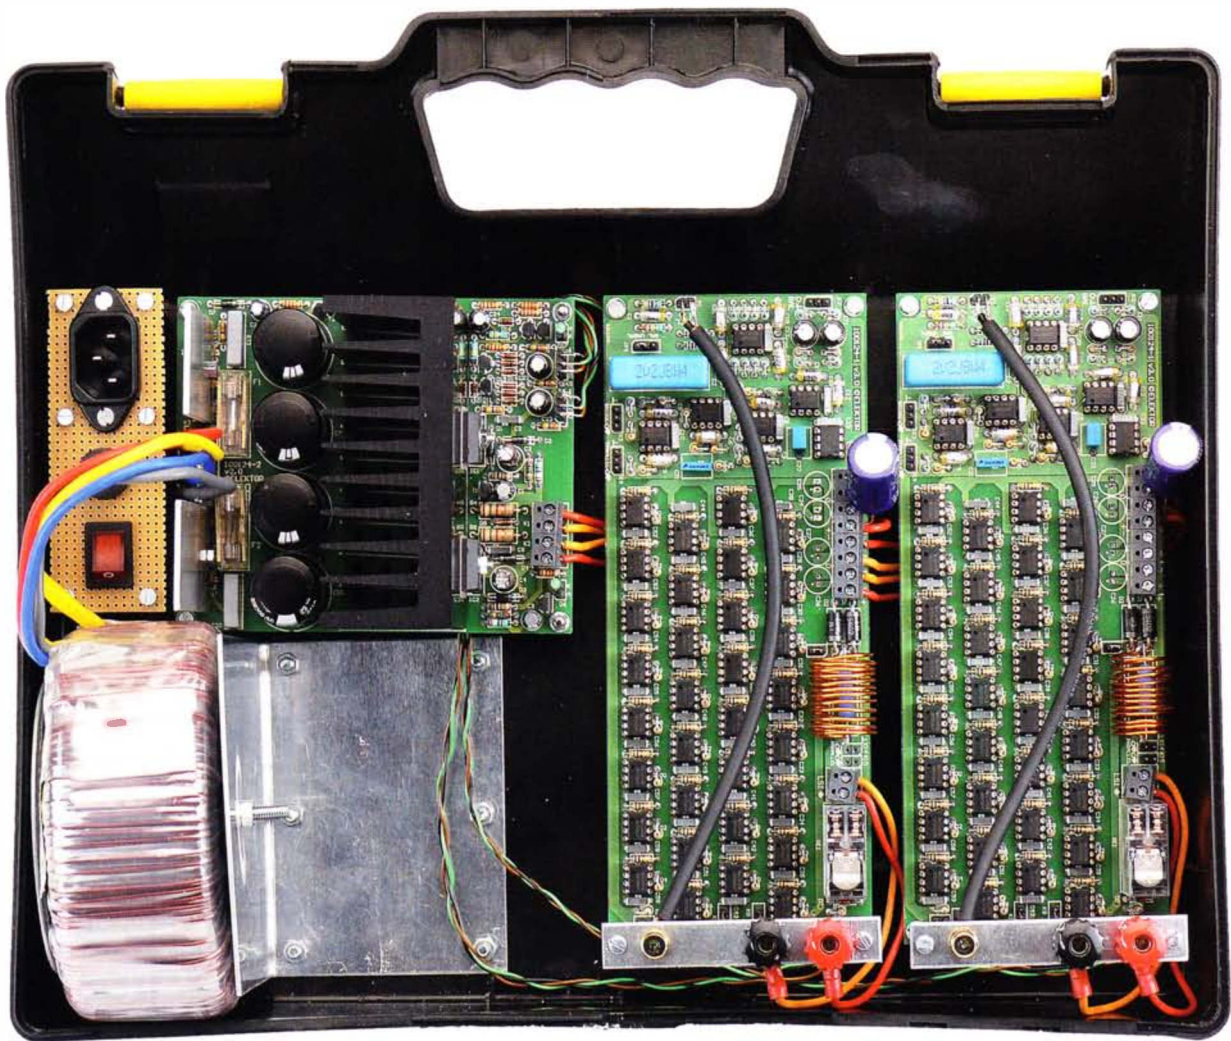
The power supply board is conventional as far as construction and assembly is concerned, but do make sure you get the mounting of the heatsink and the voltage regulators right.
